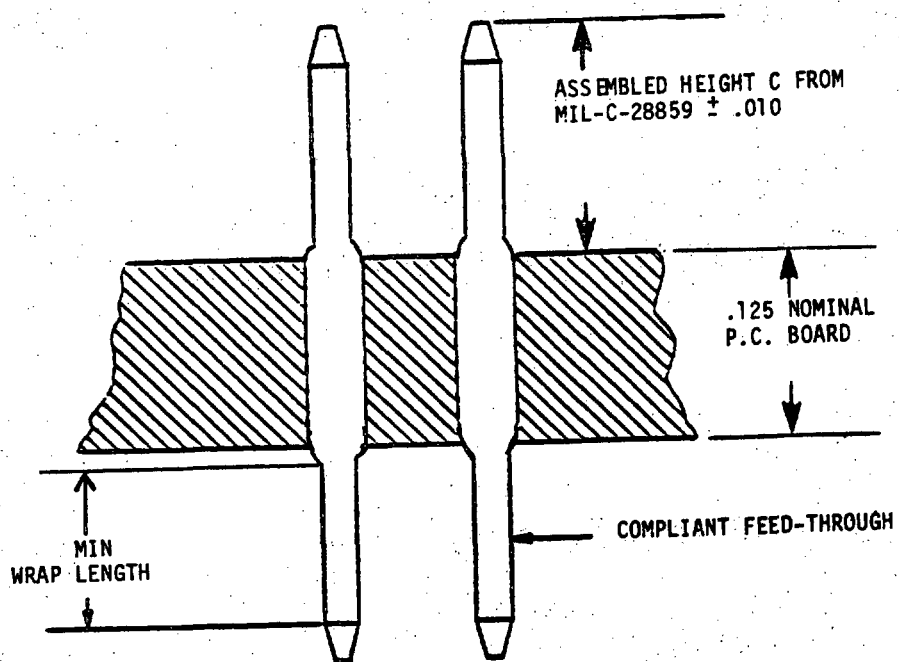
Cross-sectional view of printed-wiring electrical backplane assembly. - Continued.
